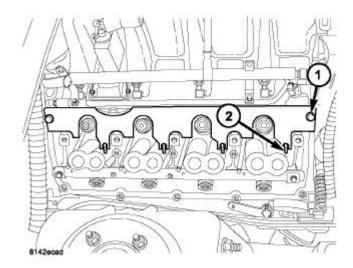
PUSHROD RETAINING PLATE Courtesy of CHRYSLER LLC
